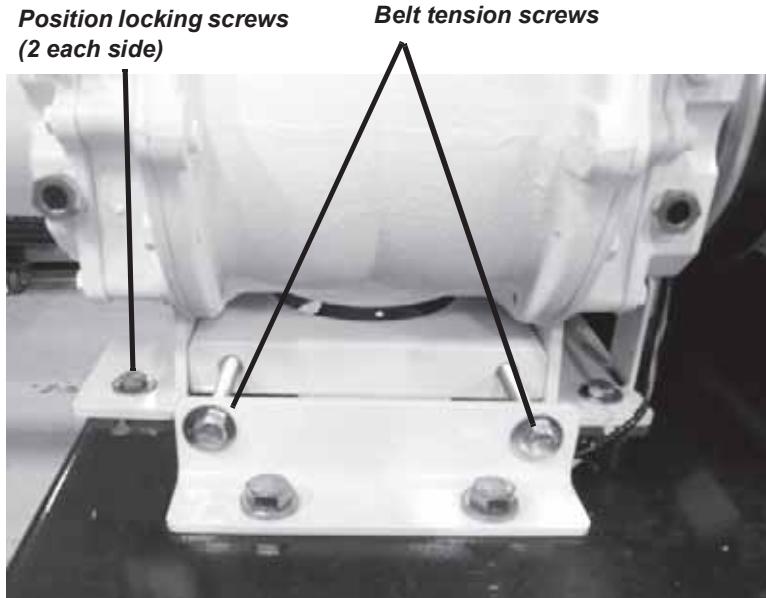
Use the tension screws on the blower mounting plate to loosen and tighten the blower belts.
